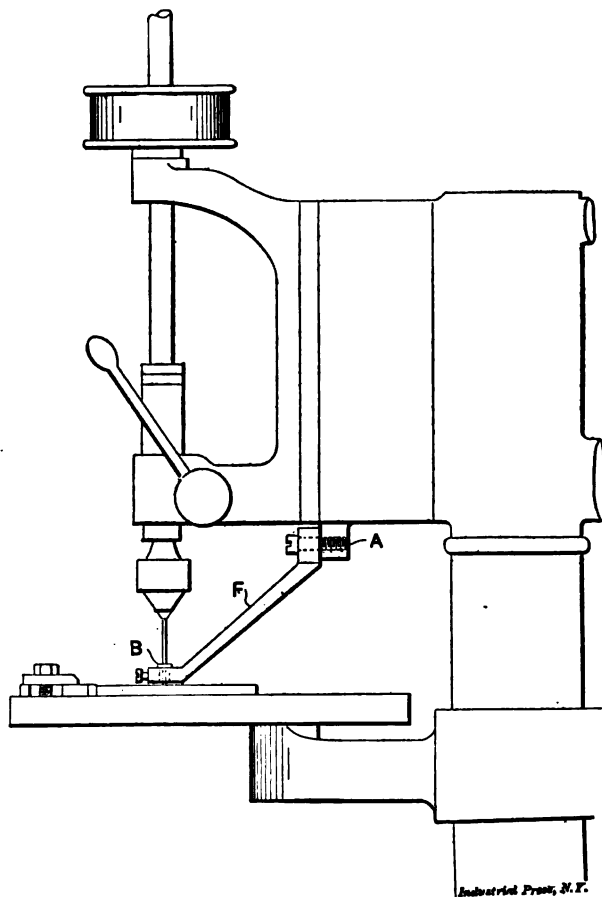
Drill Press arranged for Drilling Jig Plates.
